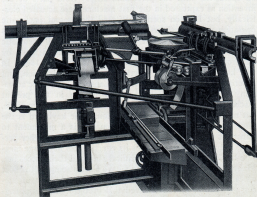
The first Lanston monotype machine. This machine made its types by compression.
